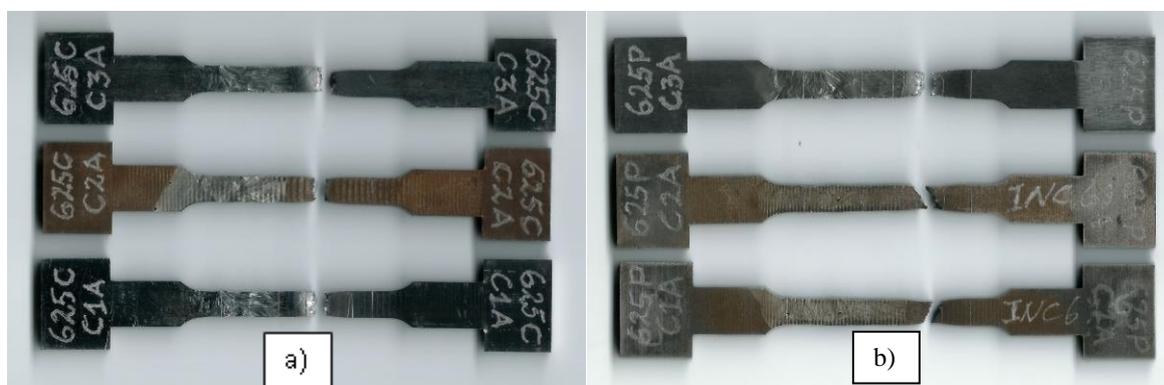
Samples tested: a) Welded with conventional current and b) Welded with pulsed current
